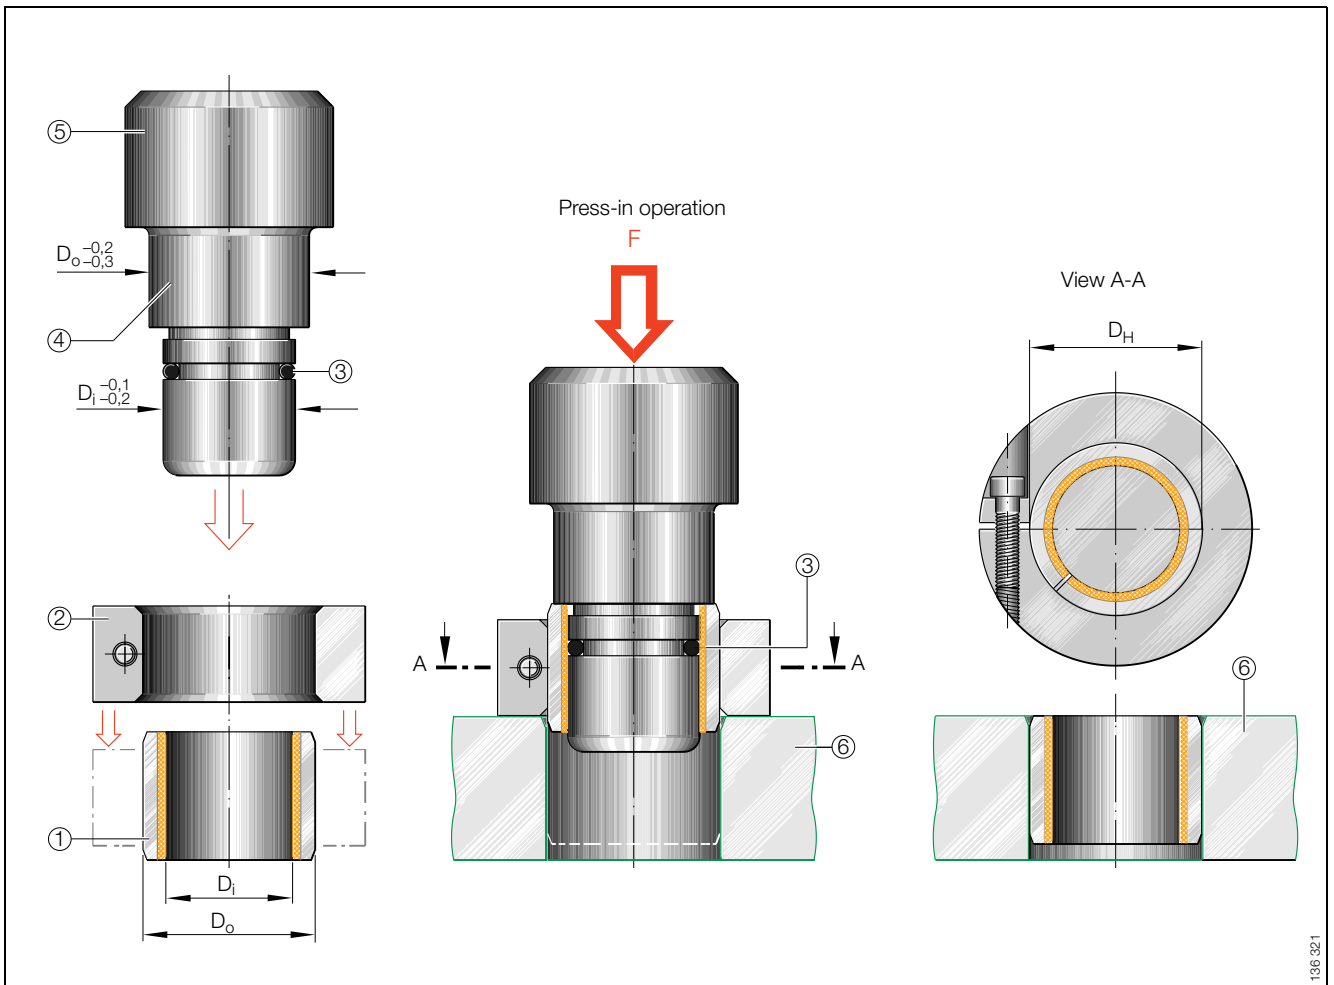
· Pressing in bushings with auxiliary ring for D für  $D_o \geq 55$  mm
